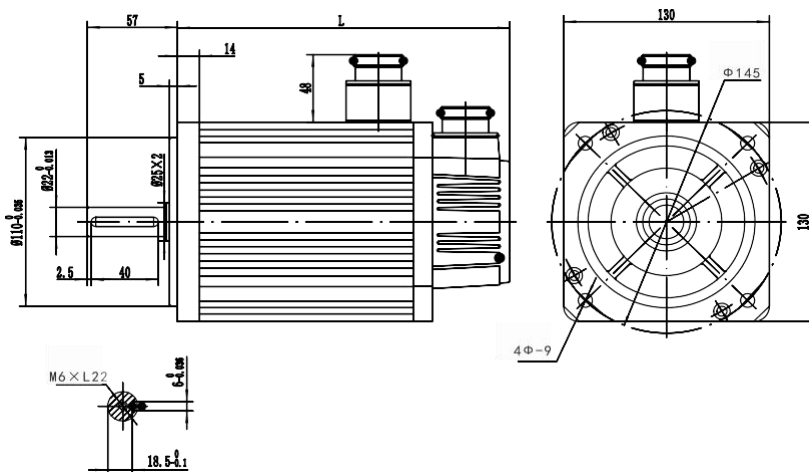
Installation dimension drawing of 130 flange servo motor
